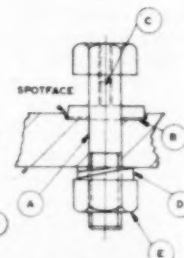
Spotface cutter for use when the facing is inaccessible or when the surface is found to be damaged during assembly
